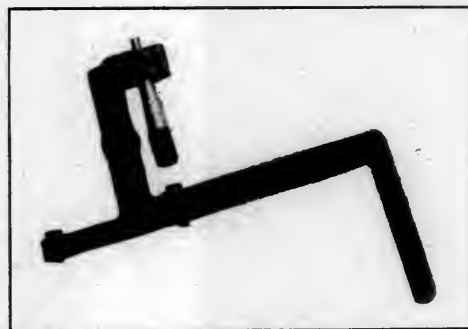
MICROMETER WHEEL BORE CALIPERS.
